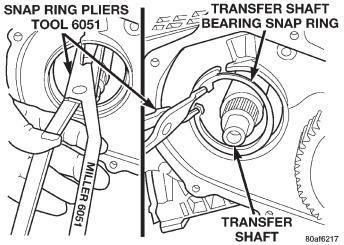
Remove Transfer Shaft Bearing Snap Ring NOTE: Screw Tool 5049-A onto transfer shaft. Remove transfer shaft.
